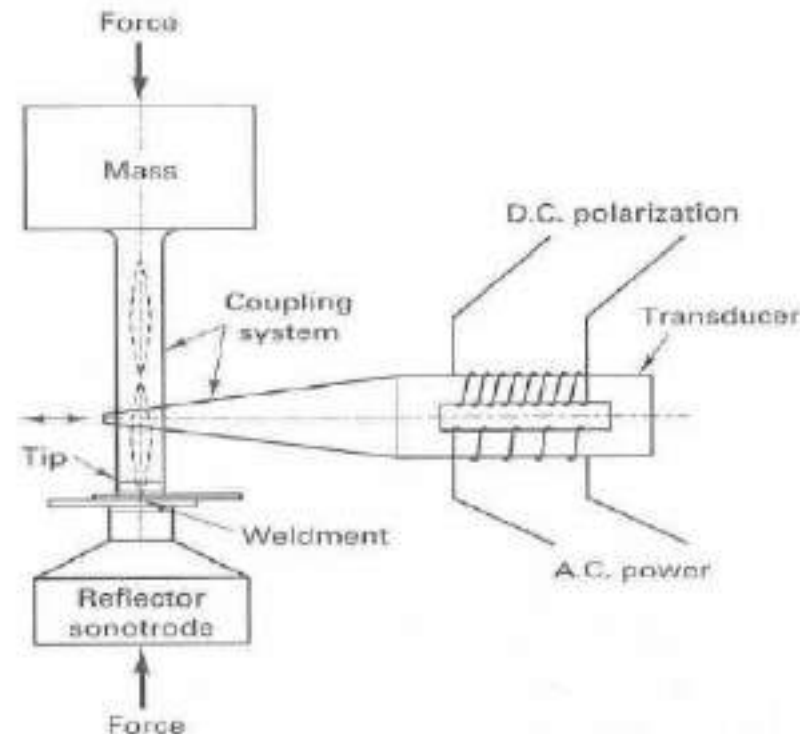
Schematic diagram of the equipment used in ultrasonic welding.
